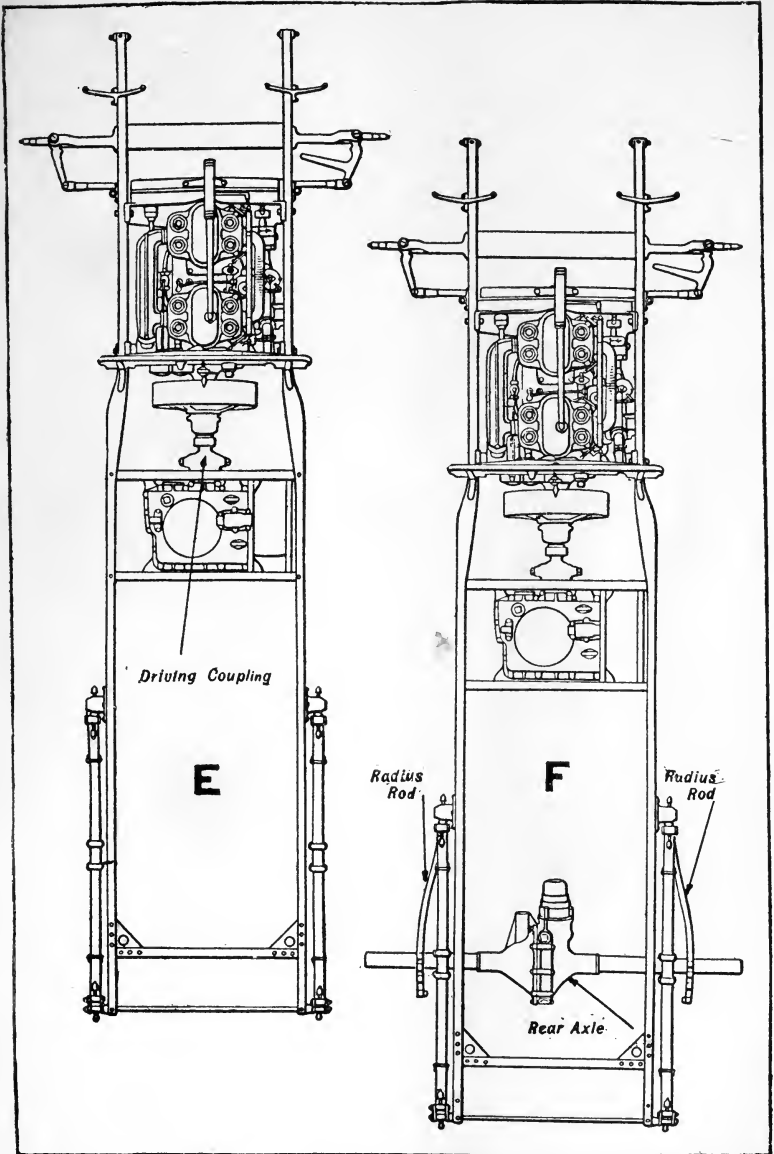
How the Pleasure Car Chassis Looks with Rear Axle Installed and Gearset Coupled to Engine.
